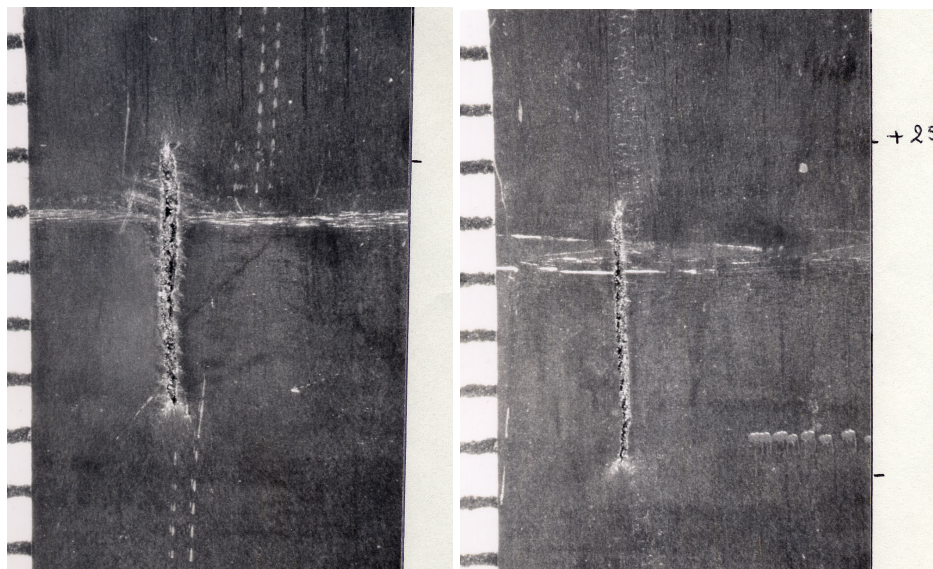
Macrograph of two cracks after flattening the half tubes of mock-up 17H.
